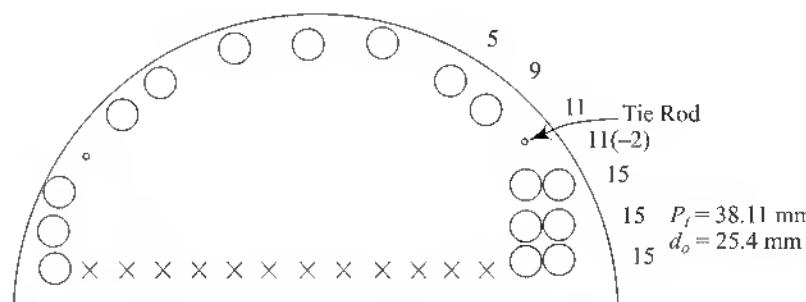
Tube Sheet Layout Drawing for $D_b = 600$ mm, $N_t = 162$
